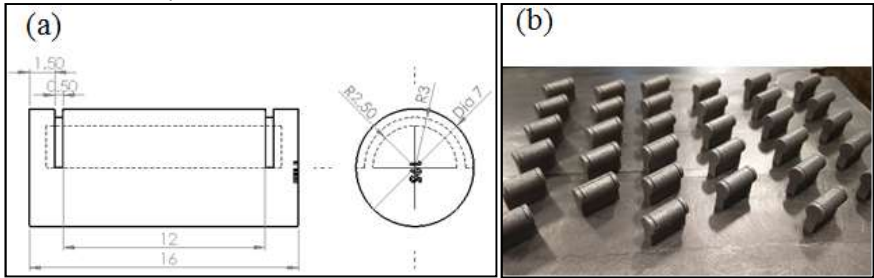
(a) CAD model of the specimen (unit in mm) and (b) Semi-hollow cylinders with single track built on the base plate.
